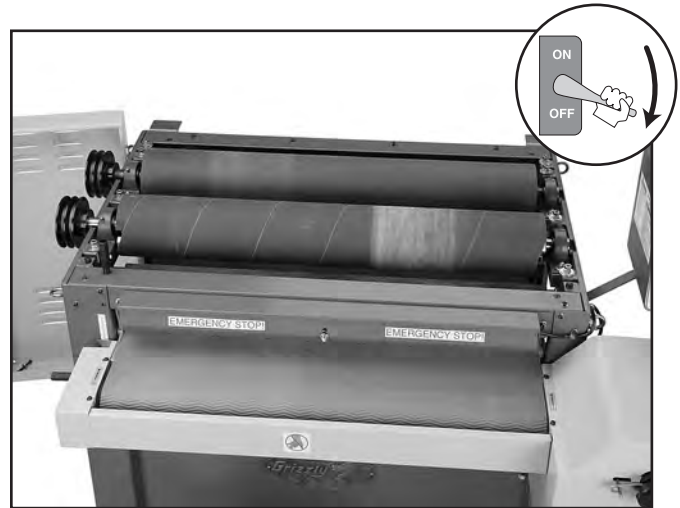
Drum sander with handwheel, top cover, and V-belts removed.
